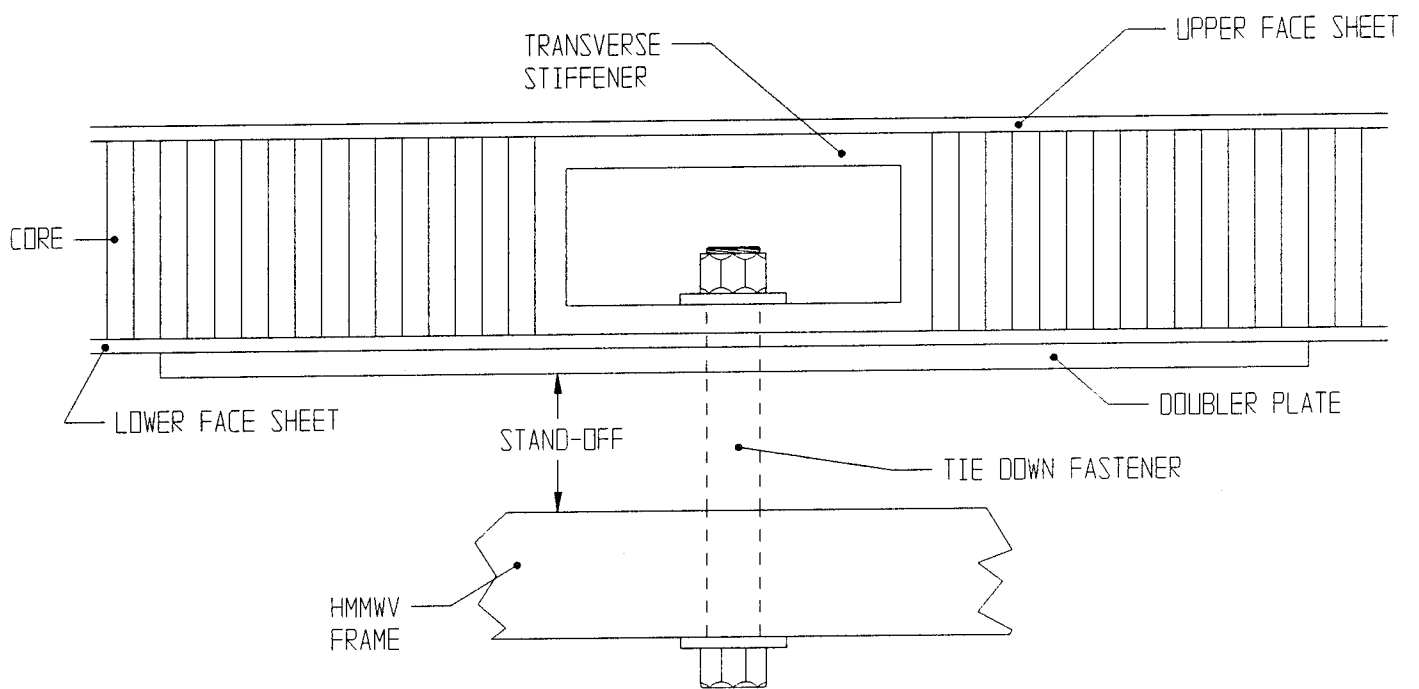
Floor Panel w/ Integral Transverse Stiffener & Doubler
